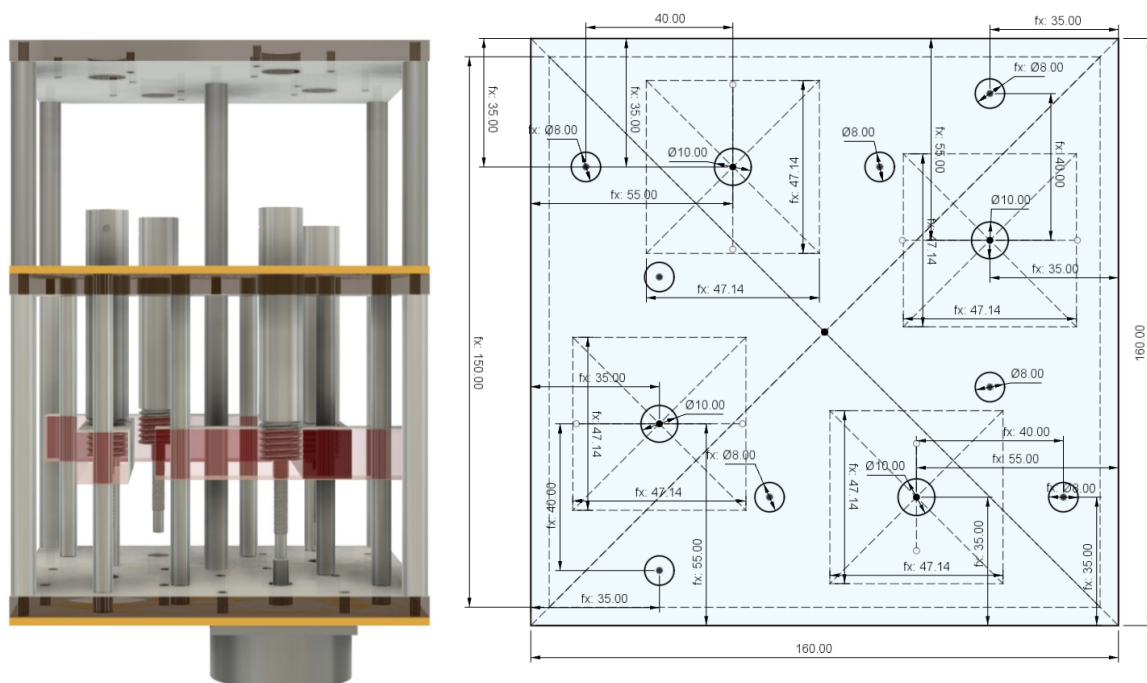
3D CAD representations of the 4-position stepper motor assembly (Left) and technical drawing of the layout of the bottom layer of the assembly (Right).
